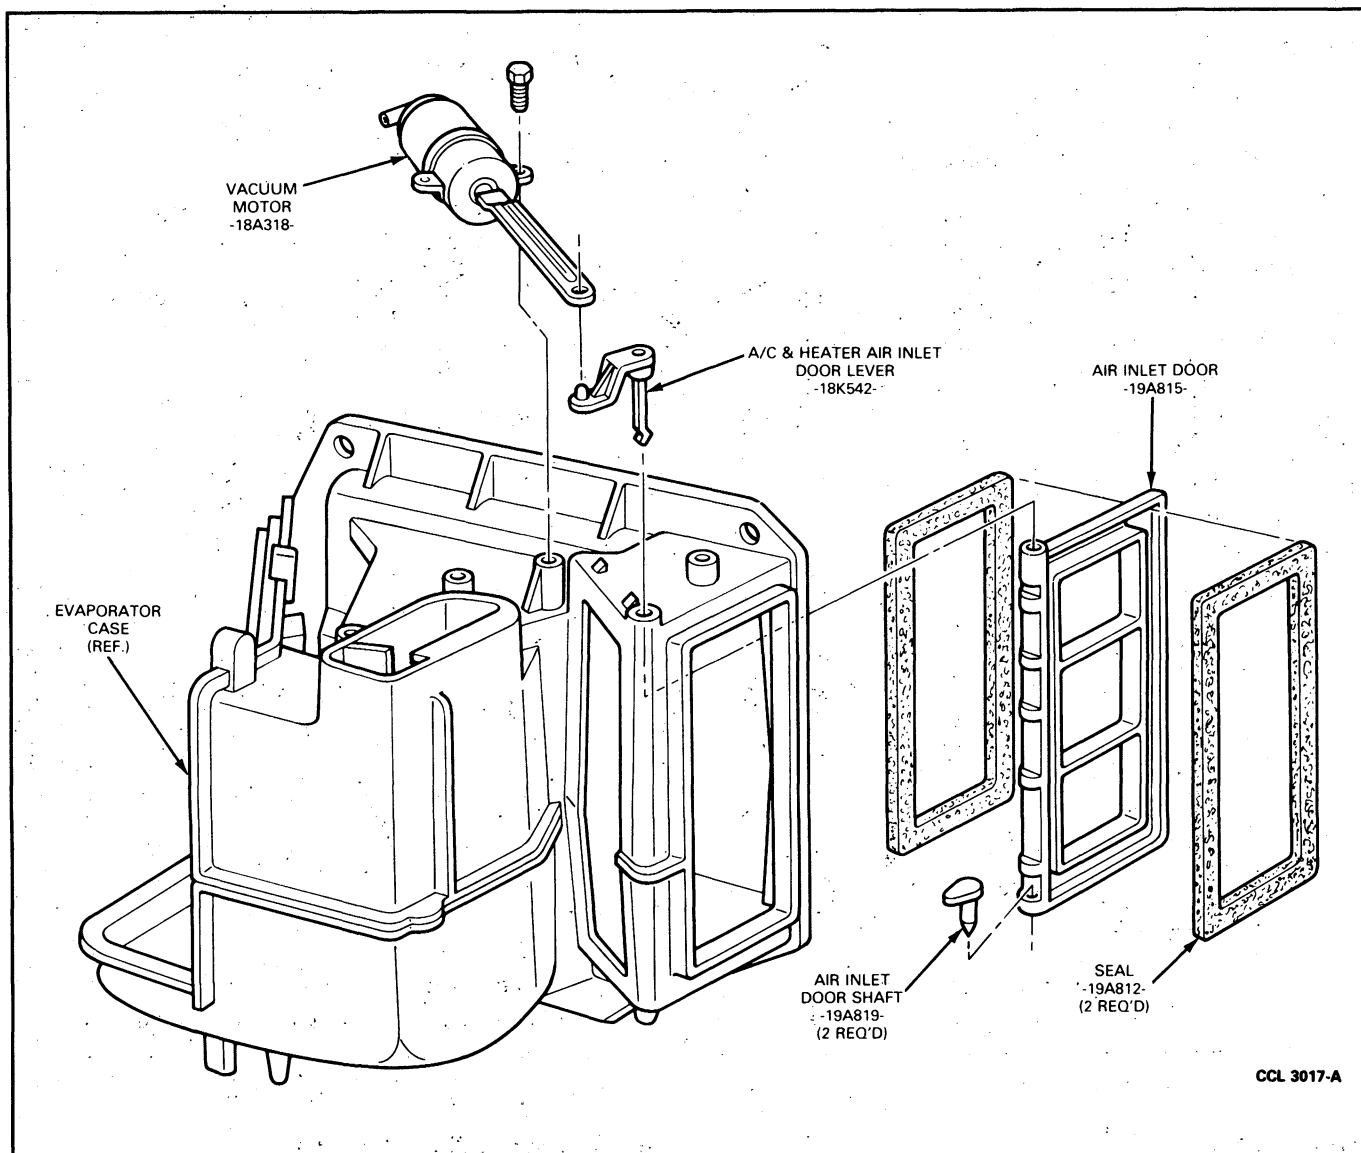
Outside/Recirc Air Door Vacuum Motor
